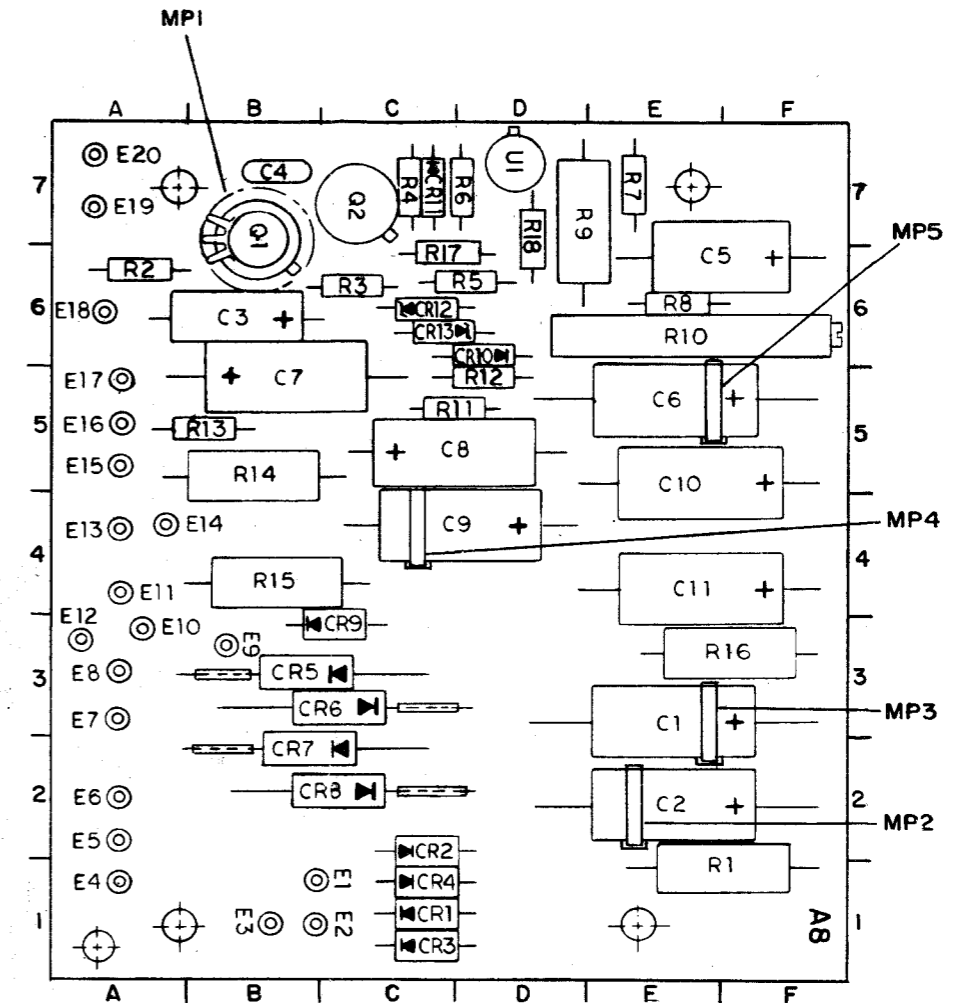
Power Supply Assembly A2A8, Component Locations
